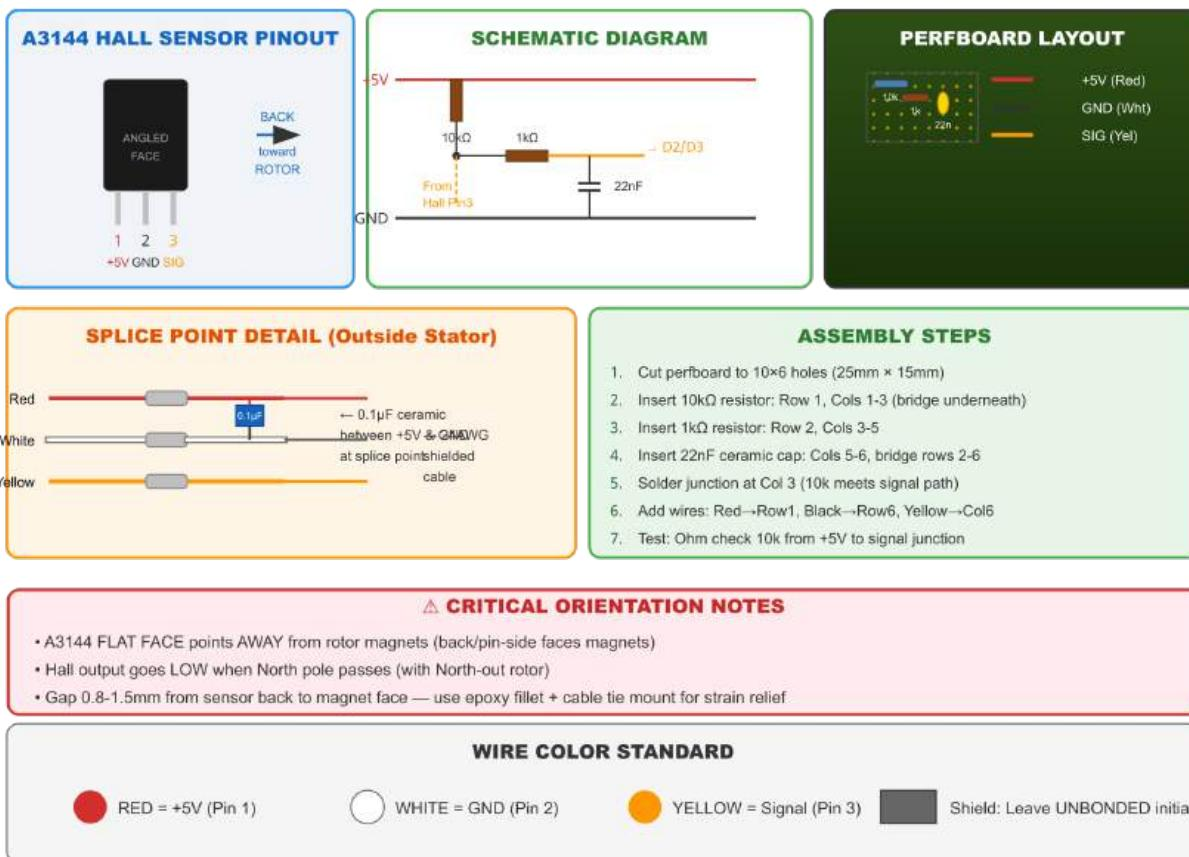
Hall Sensor Filter Assembly (Perfboard Layout)
